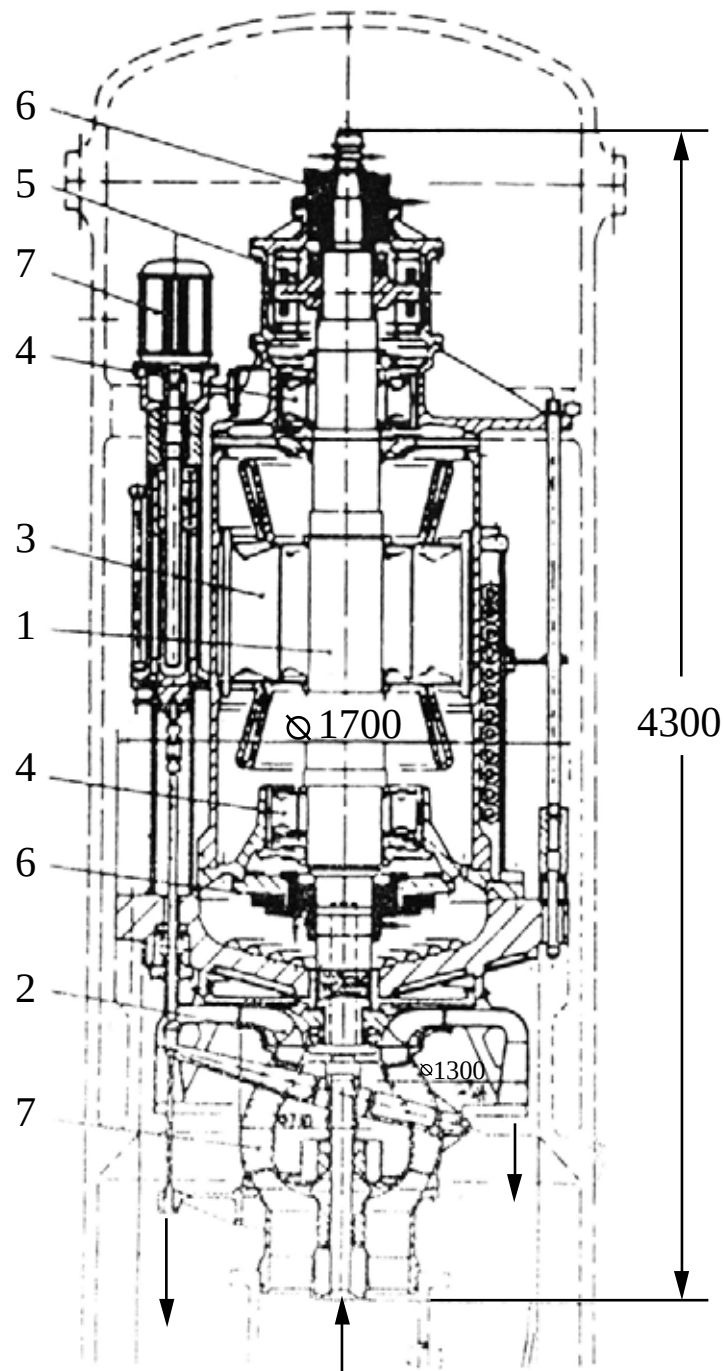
Helium circulator of HTR-100 plant: (1: circulator shaft, 2: rotor, 3: motor, 4: radial magnetic bearing, 5: axial magnetic bearing, 6: catcher bearing, 7: shut-off valve with actuator)
